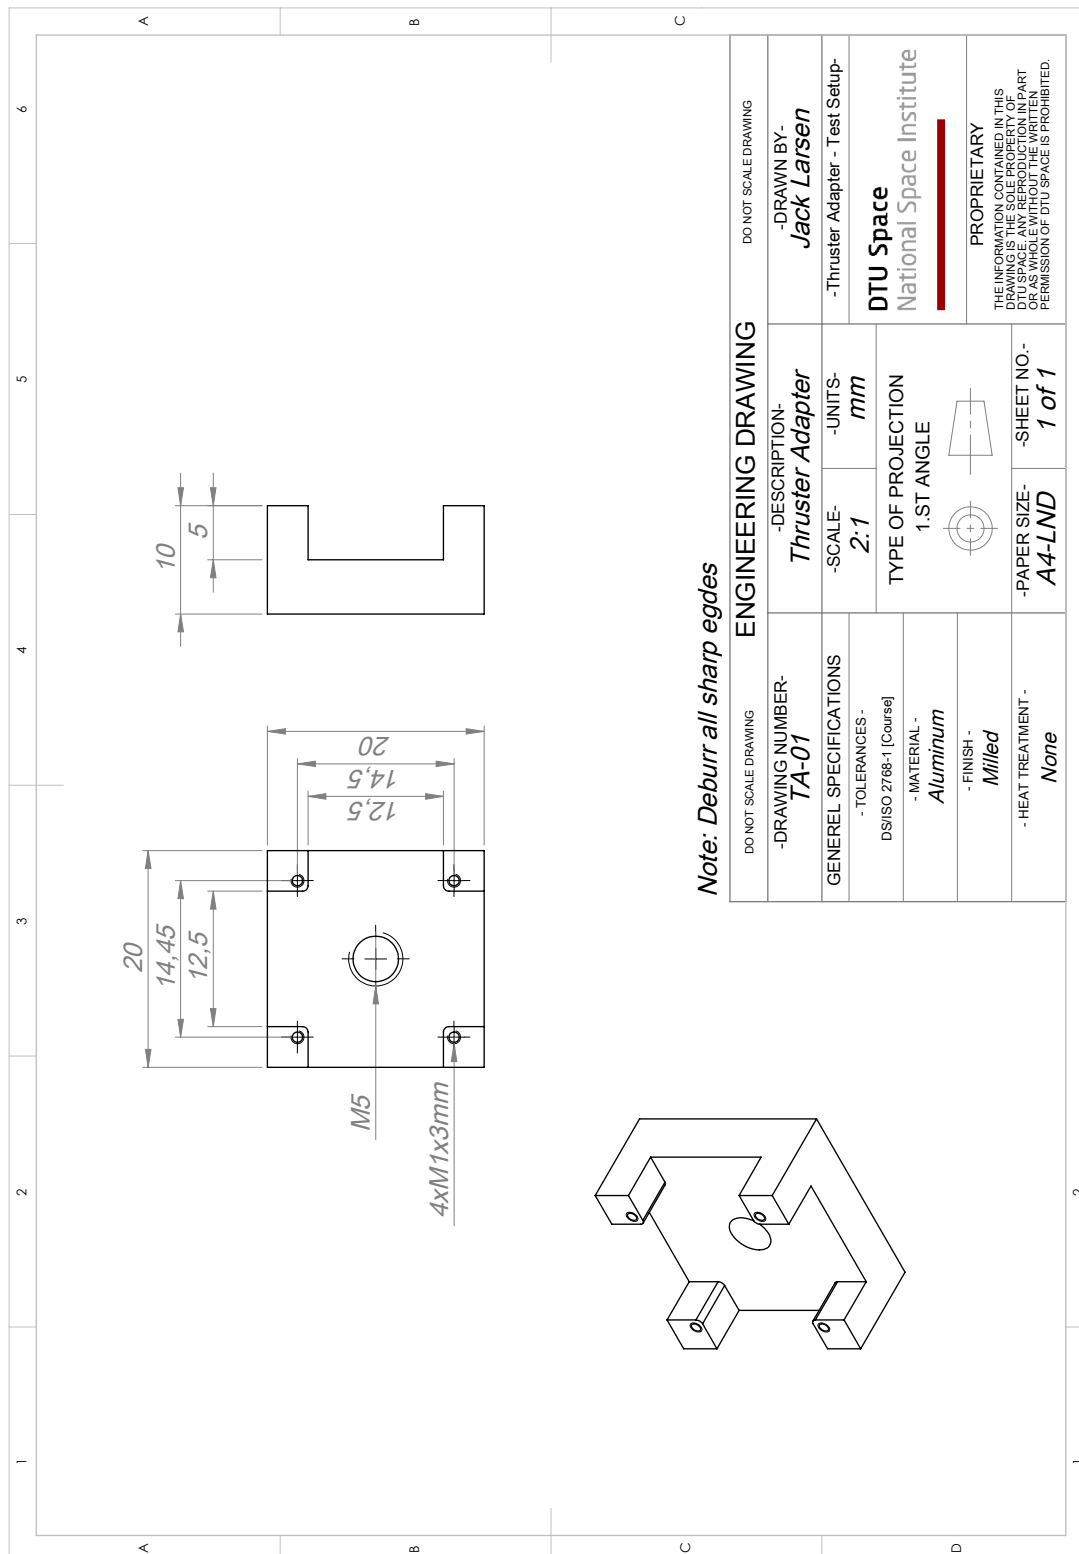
Adapter used for mounting the thruster prototypes on the test bench.
